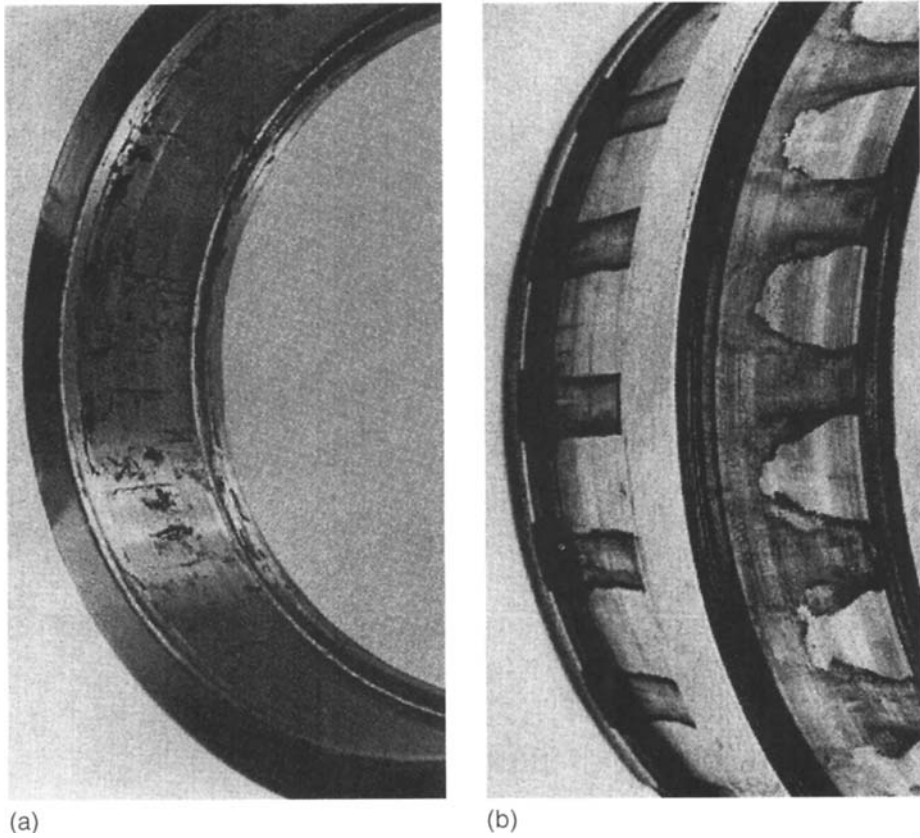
(a,b) Oxide caused by roller bearing corrosion.
